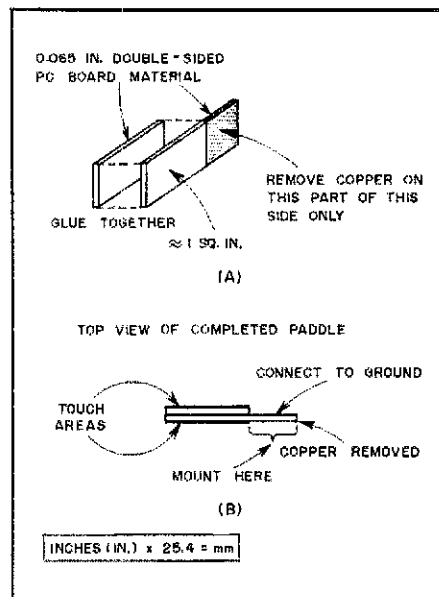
Mechanical details of the capacitive paddle. The completed assembly should be sprayed with two coats of clear lacquer.
